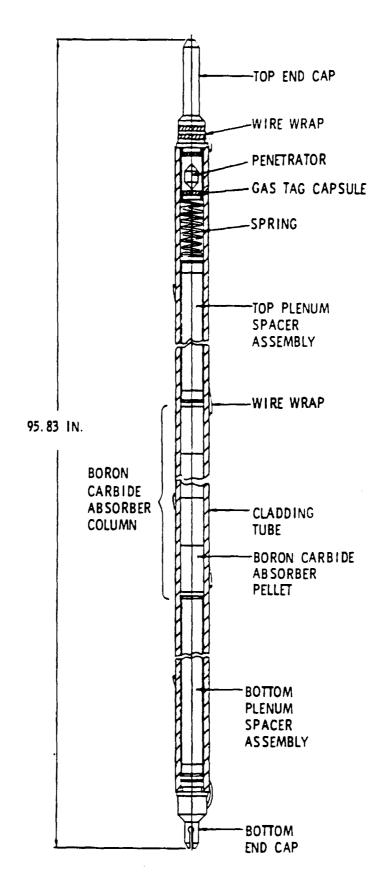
E.7. FFTF control rod fixed shim pin assembly.
